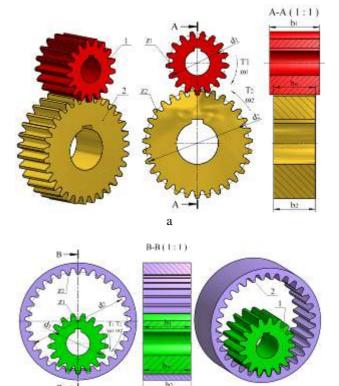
Cylindrical spur gear drive  $z_1 = 17$ ;  $z_2 = 31$ ; m = 4 mm a) external engagement; b) internal engagement
